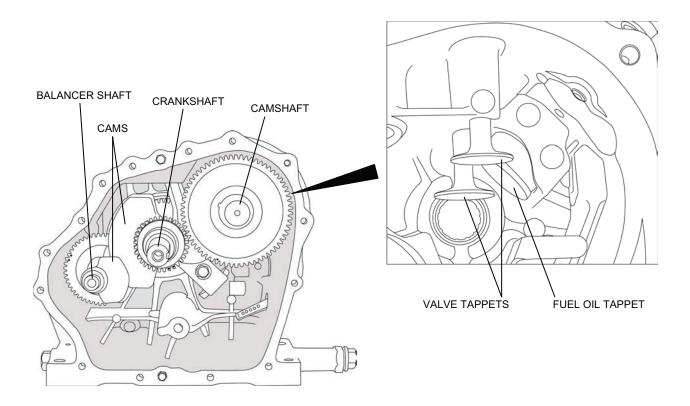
Camshaft, Valve and Fuel Oil Tappets, and Balancer Shaft Removal.
